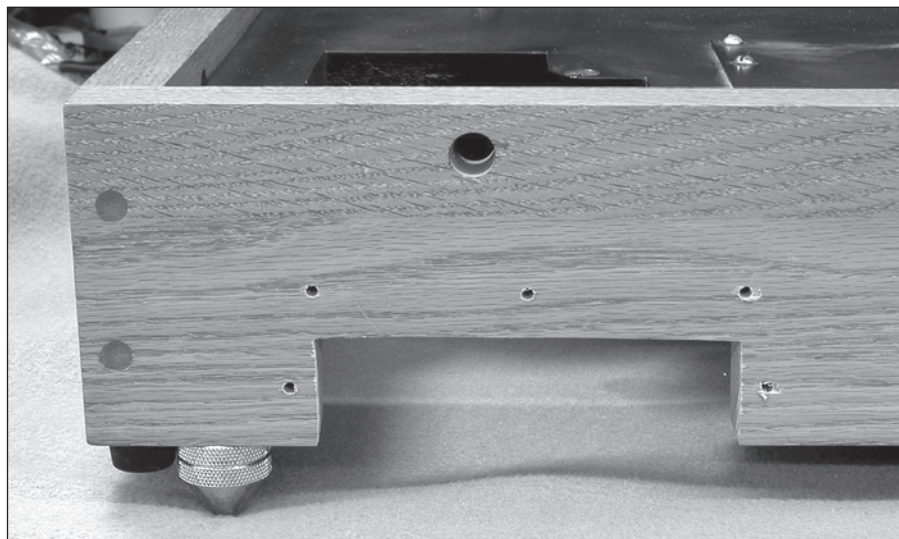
Rear view of the turntable base, showing the cutout and pilot holes for mounting the connector plate.
